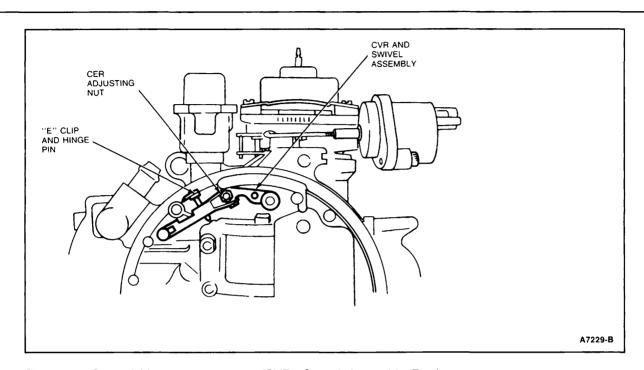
Control Vacuum Regulator (CVR) Swivel Assembly Replacement
